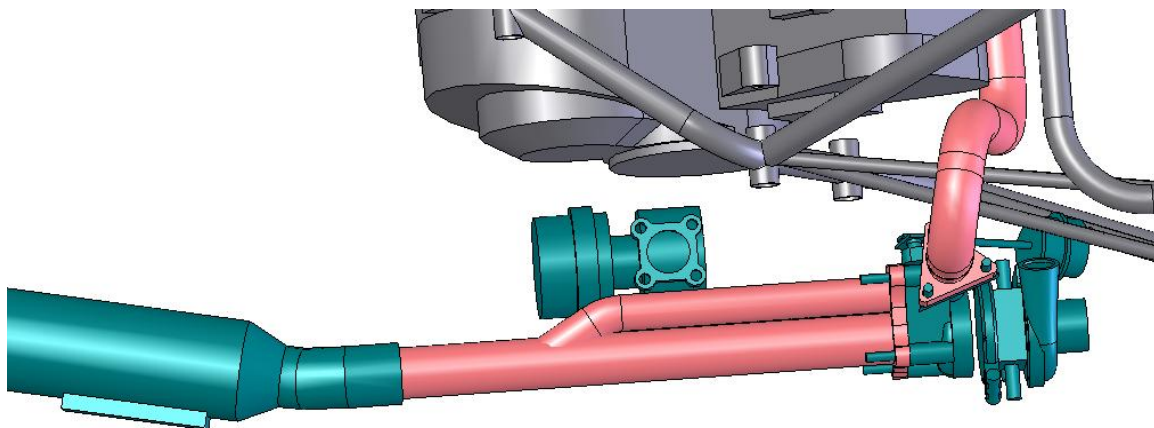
Integral wastegate dump pipe added. (Modeled by D. Curran, engine/chassis by FSAE team)
